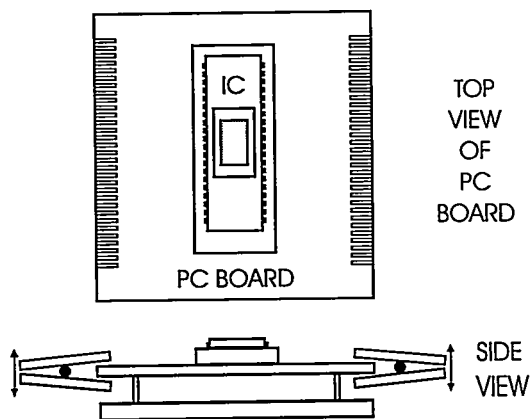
The PC board, load lock transport frame, and clamshell clamping mechanism for electrical testing of ICs in the FIB system. The side view shows the clamps in the open position.
